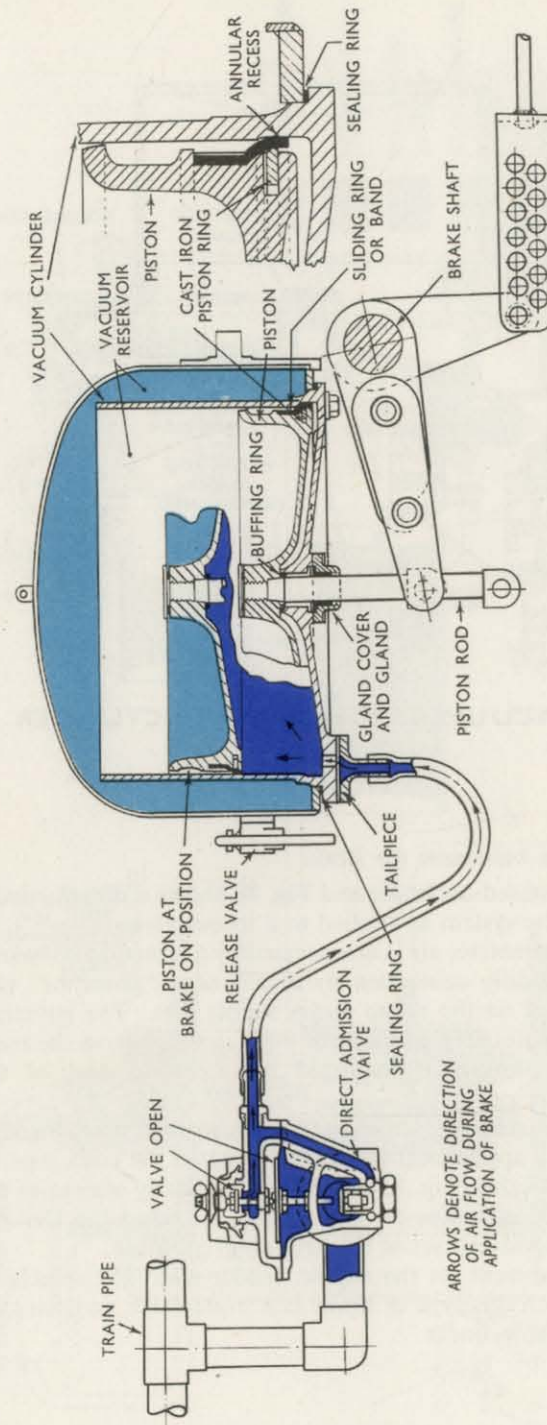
VACUUM BRAKE CYLINDER (COMBINED) SLIPPING-BAND TYPE
